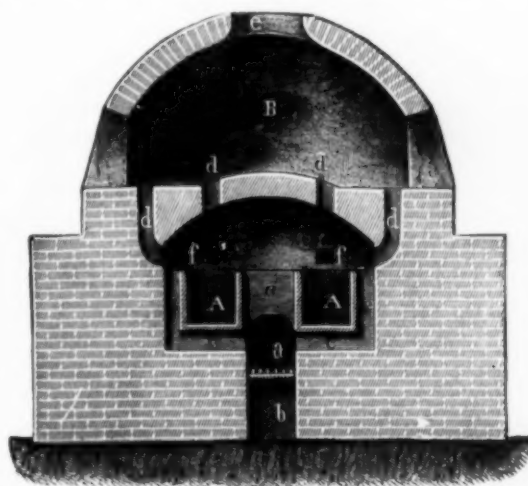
CROSS SECTION OF CEMENTATION FURNACE
